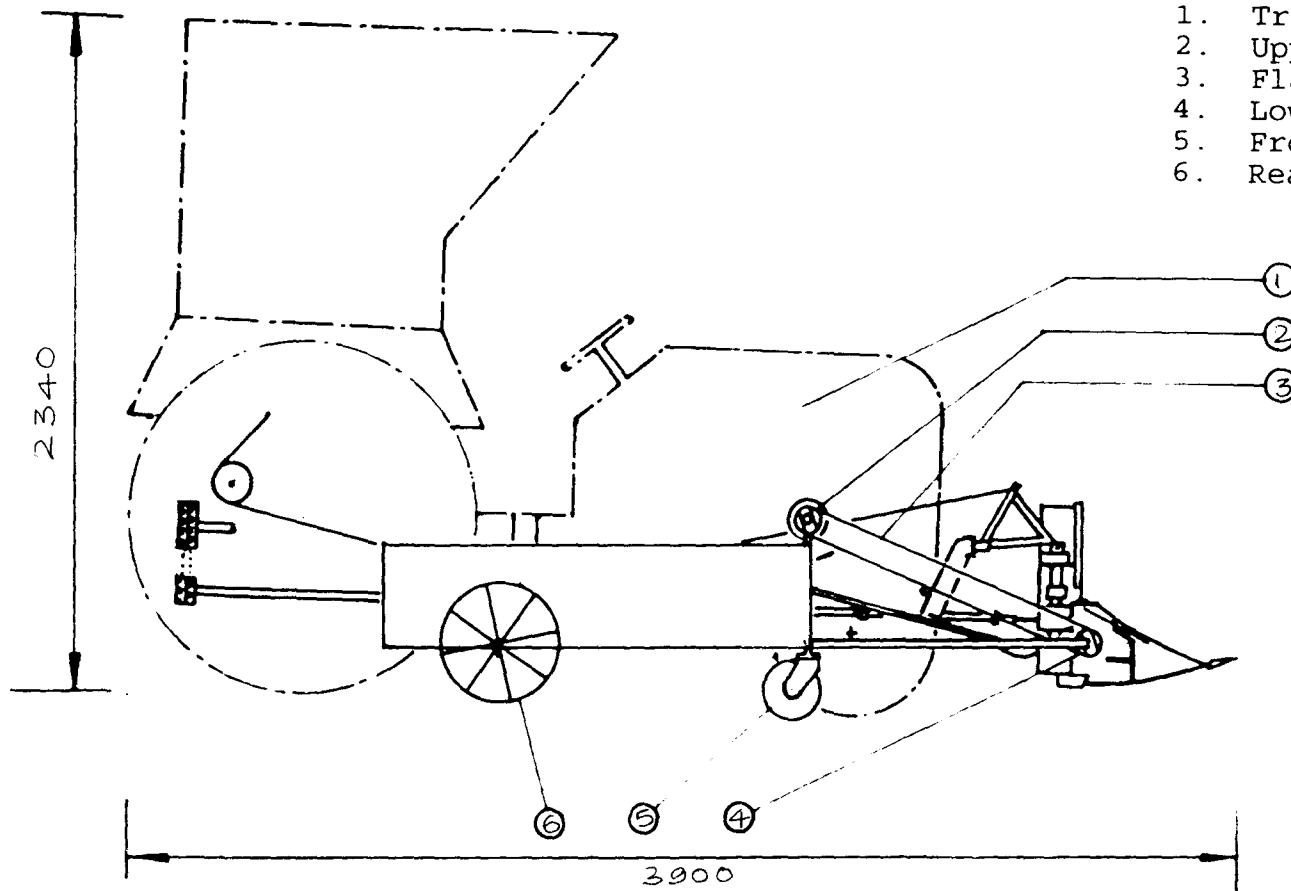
SIDE VIEW OF TRACTOR FRONT MOUNTED REAPER WITH COLLECTION UNIT
